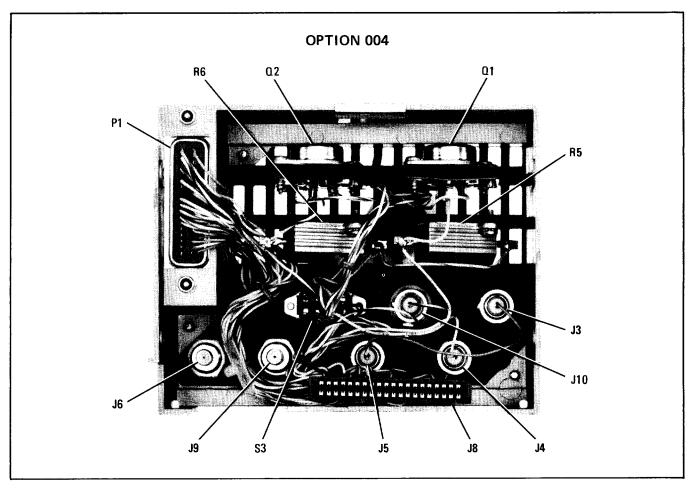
Rear Panel Component Location Opt. 004 (CHANGE F)
